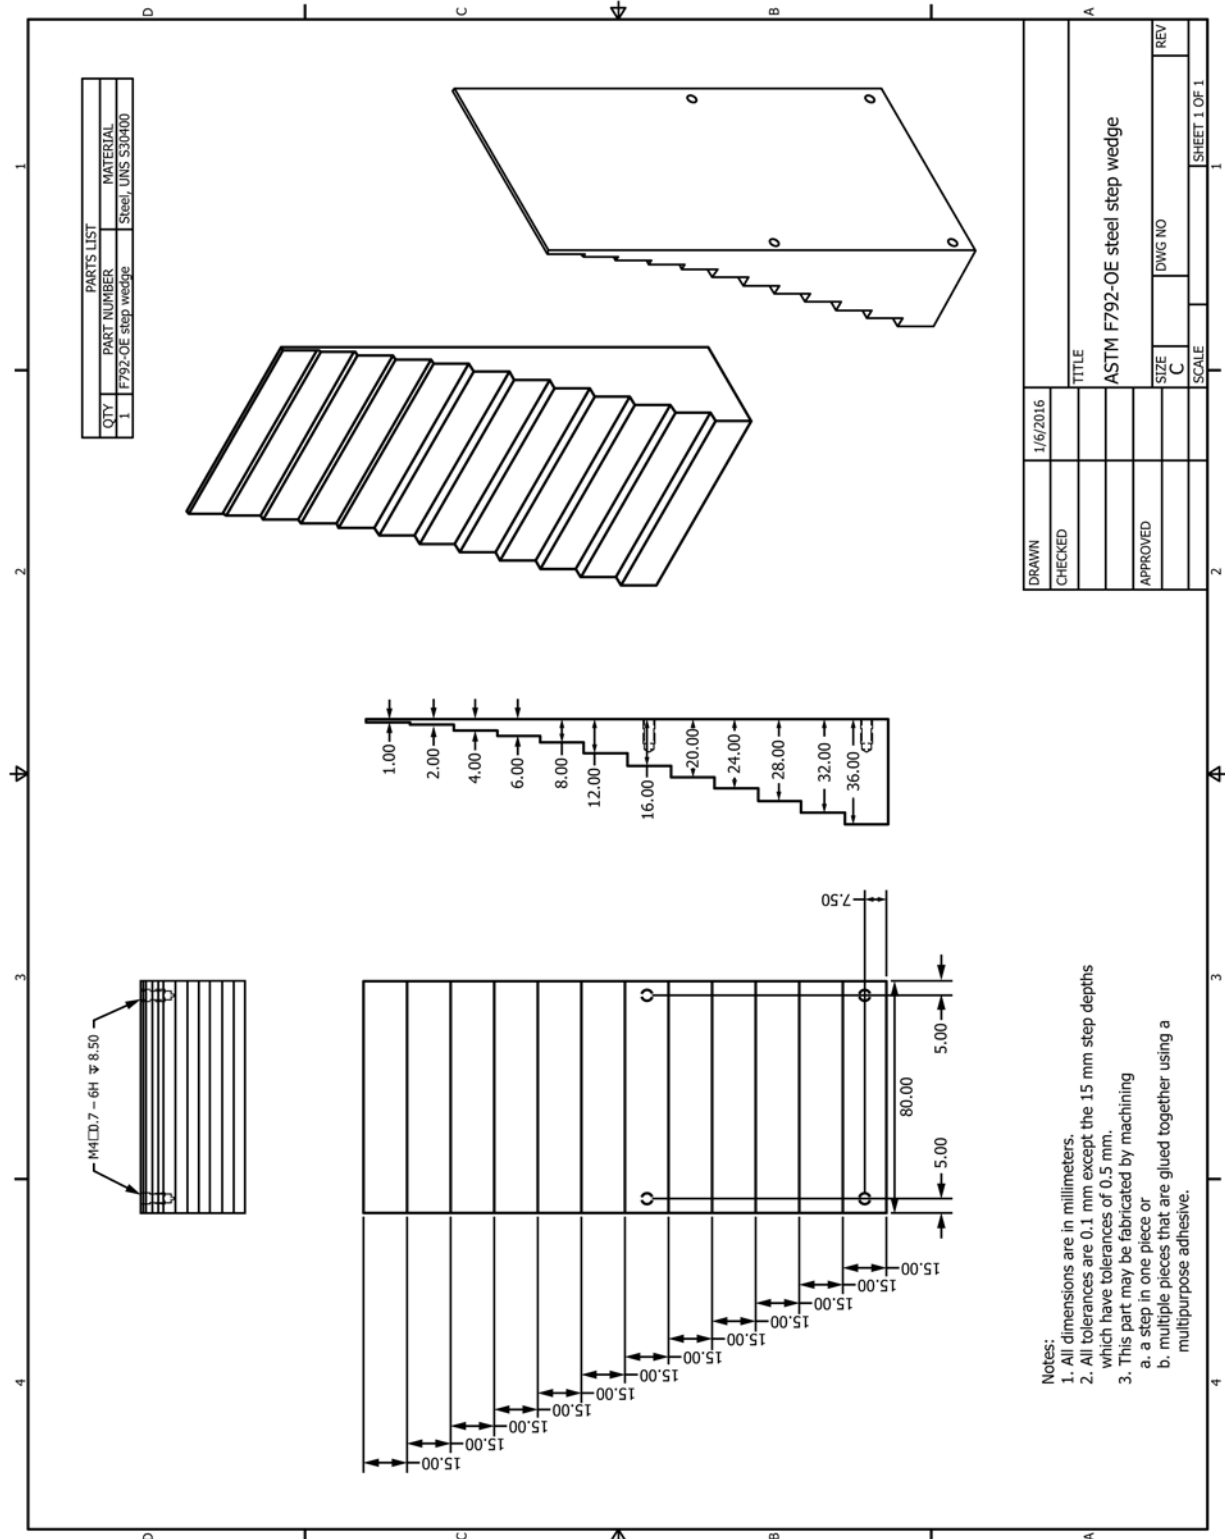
Mechanical Drawing of the Practice F792 - OE Steel Step Wedge
